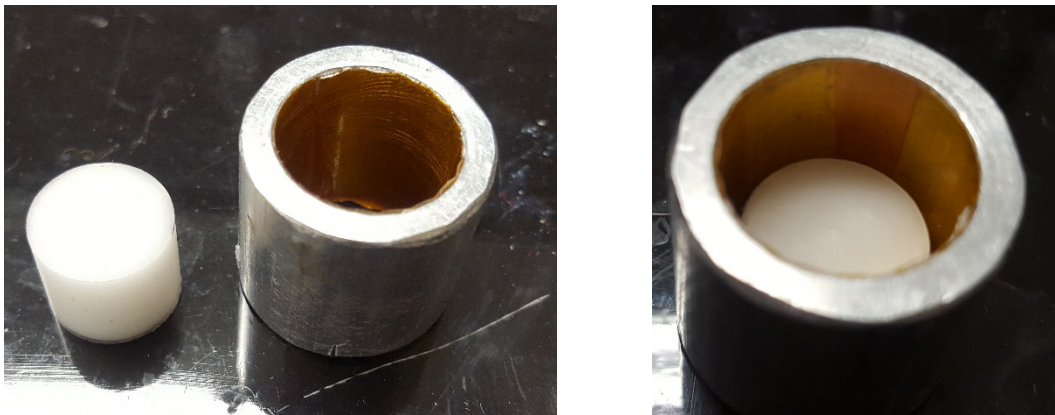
Aluminum cylinder mould with heat resistant tape and Delrin insert
